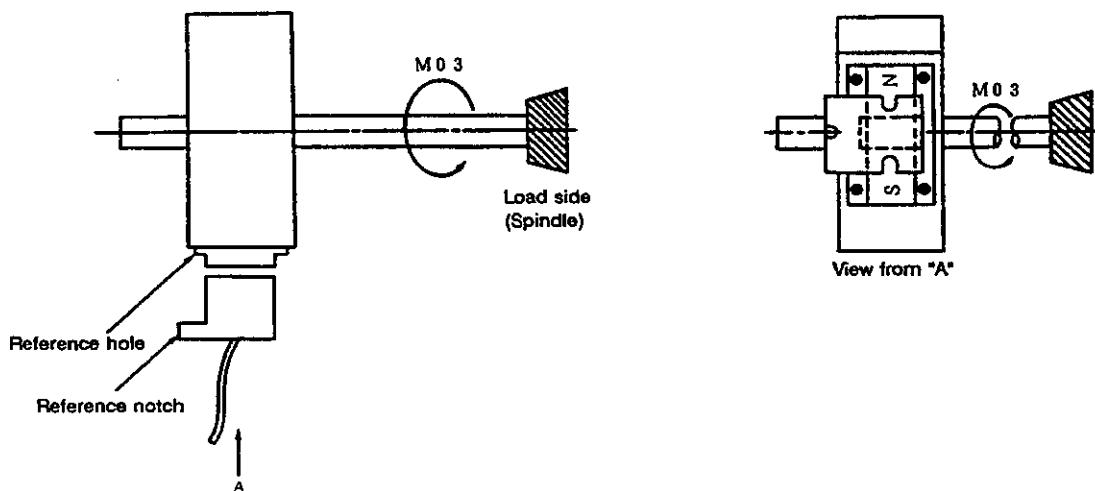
Magnet installed on circumferential surface of rotating disk on shaft
